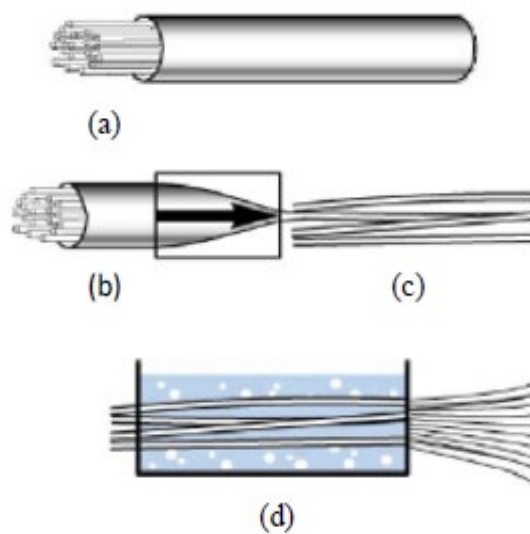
(a) Metal coated wire combined in iron tube; (b) Several diameter reductions of tube; (c) Bundling of tubes; (d) Leaching, realizing fibres [2.42]
